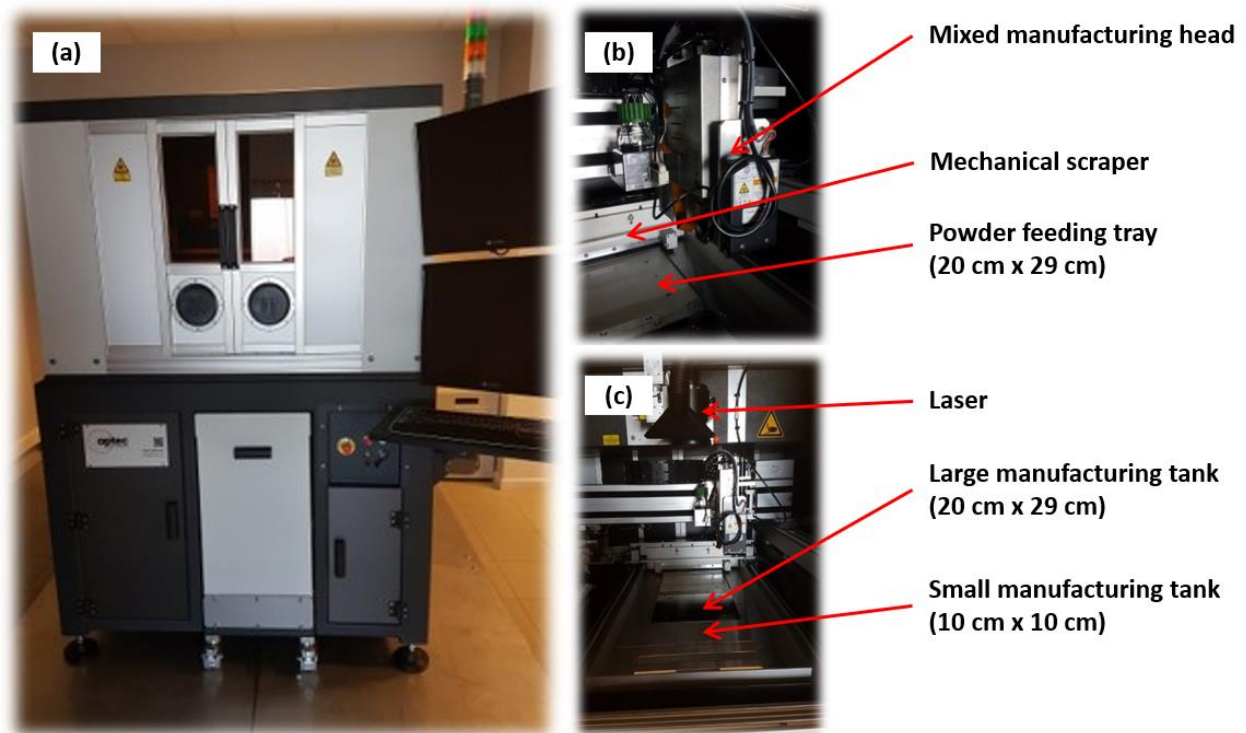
The customized binder jetting machine in BCRC & OPTEC. a): Outlook of the machine; b), c): Inner details of the machine and setups
